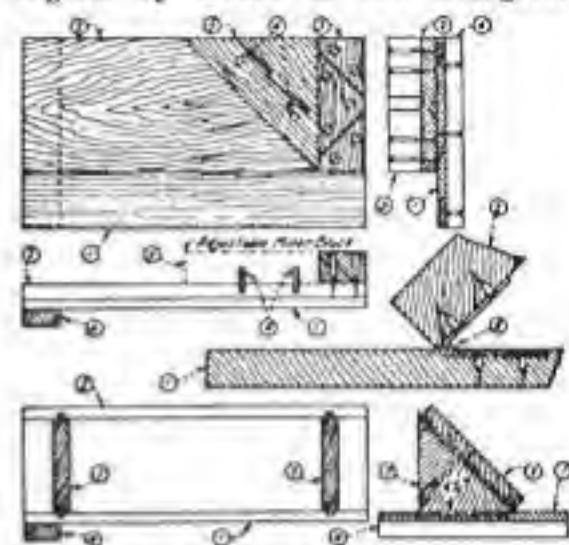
Details for the construction of the combination bench hook, miter block, and shooting board shown in Fig. 32.
